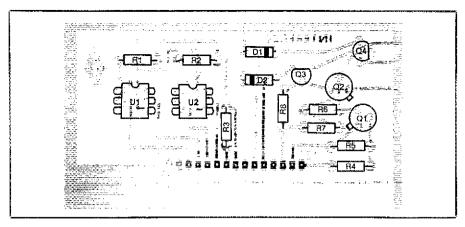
Parts-placement guide for the interface board. This view is from the component side of the board. Gray areas represent an X-ray view of the unetched foil. A circuit-board etching pattern appears in the Hints and Kinks section of this issue.
